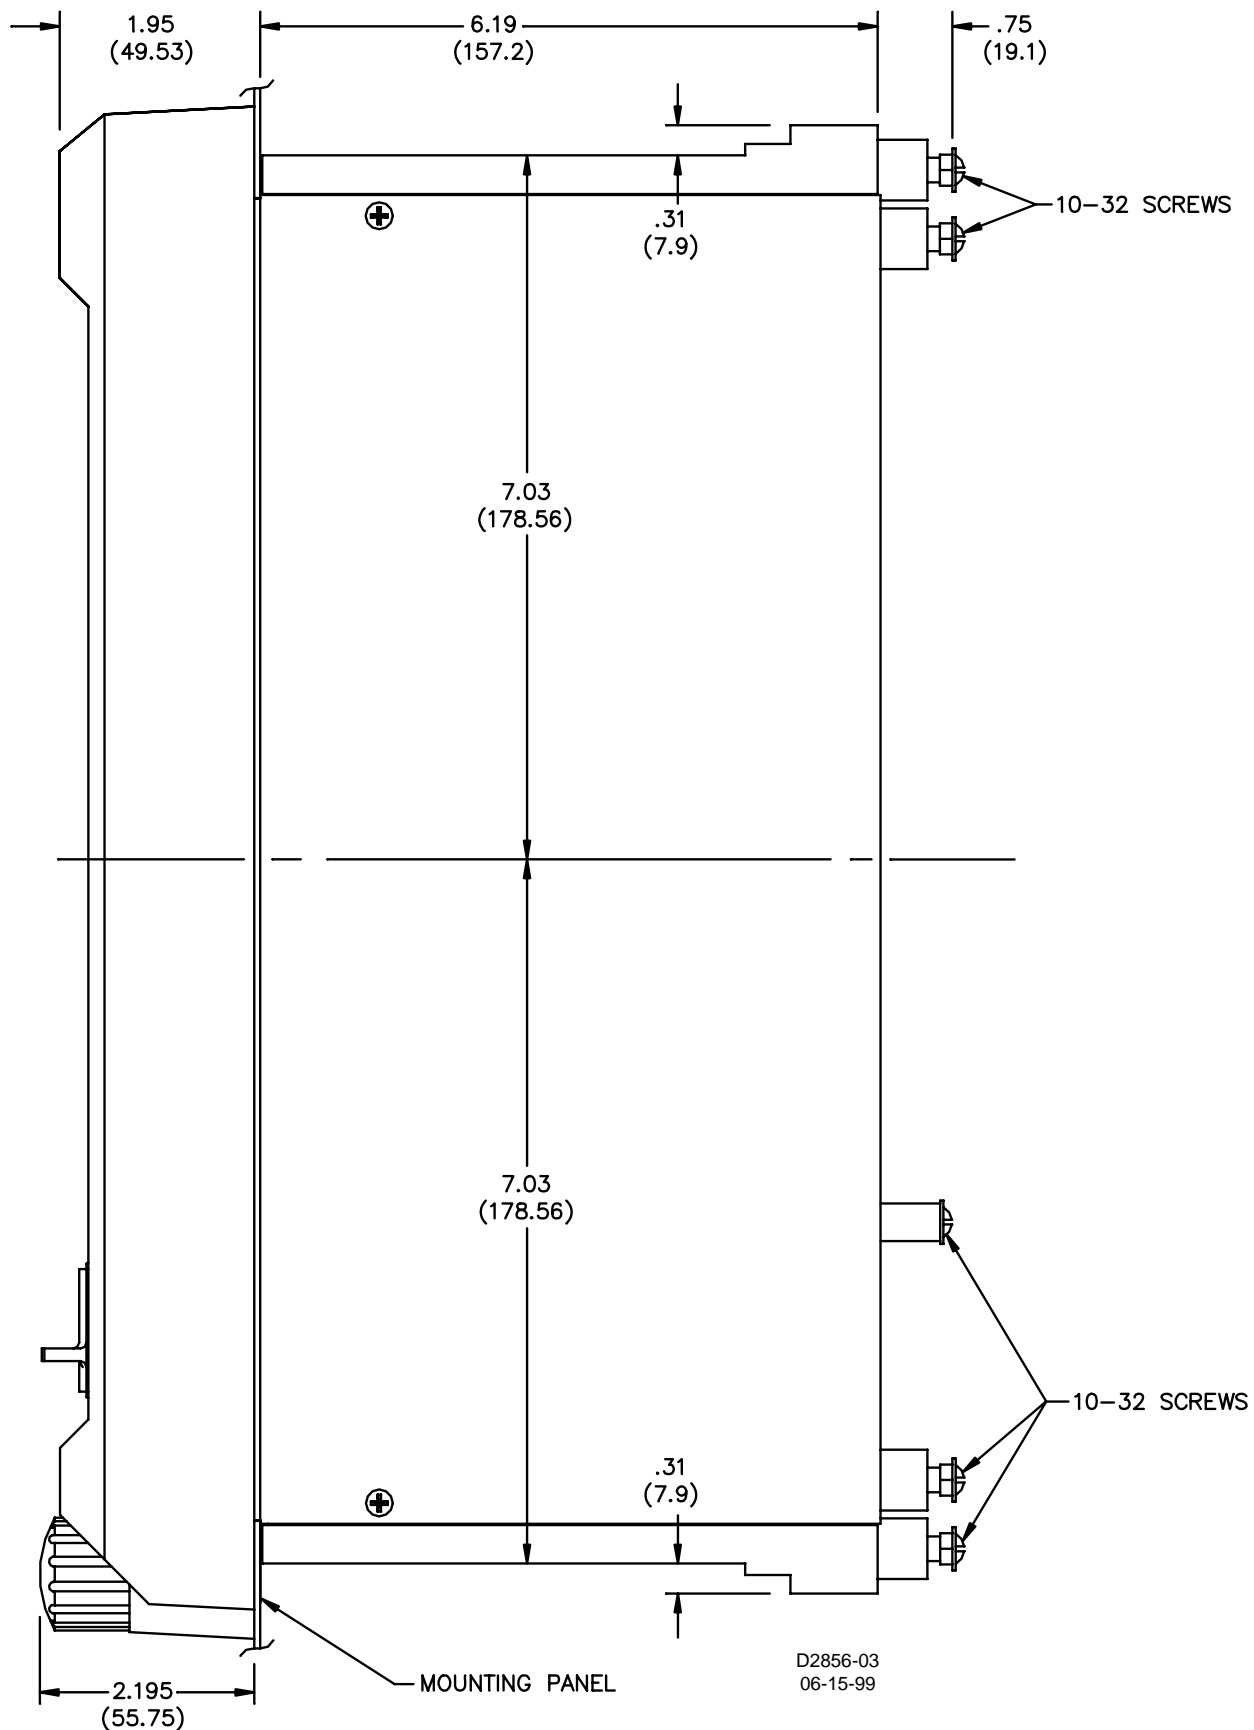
Case and Cover Dimensions, Semi-Flush Mounting, Side View
